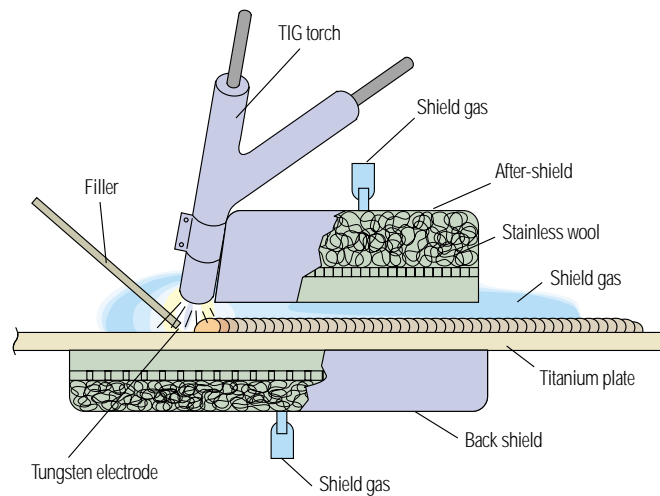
TIG welding torch and shield jig for titanium plate
